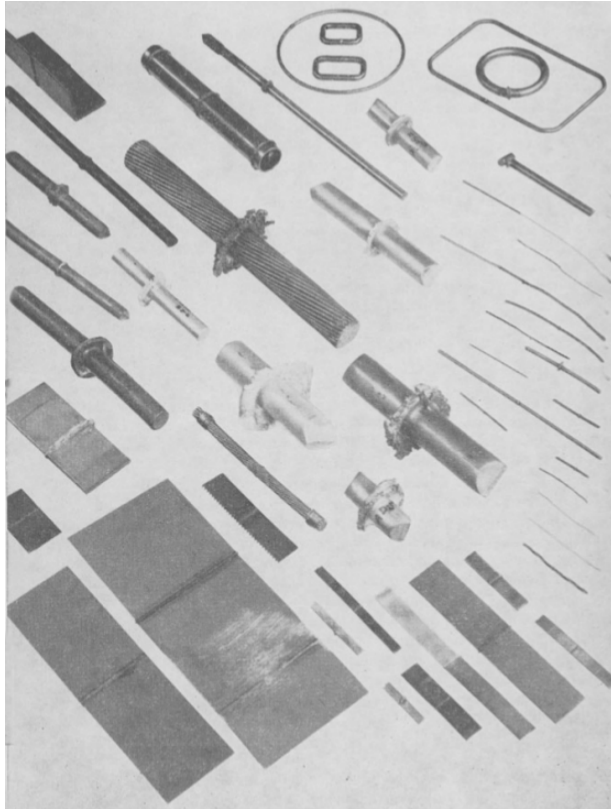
Typical products joined by upset welding (PHILLIPS, 1969).
